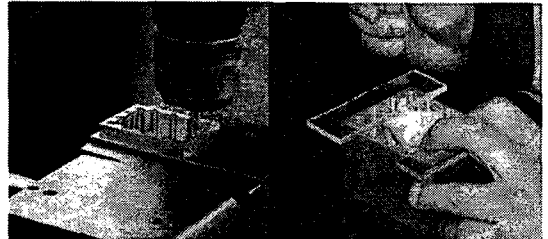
(a) Manufacturing process of horn base, (set-up of horn stock, inserting of upper-side part into the machined cavity)
